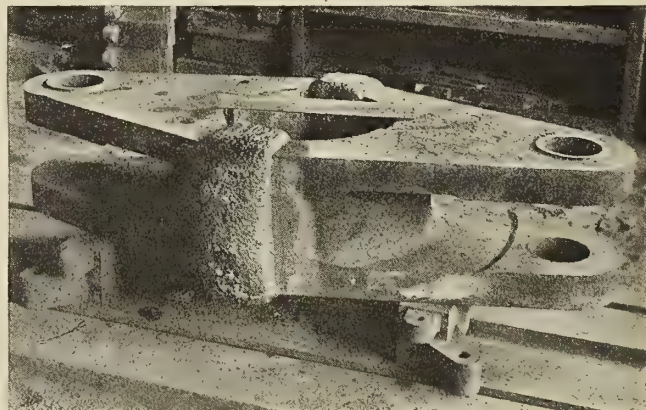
Thermit Welds on Rudderheads After Removing Risers and Pouring Gates
